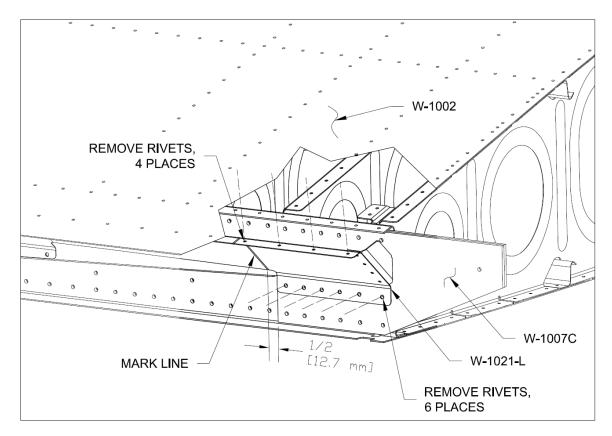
REMOVING FLAP GAP FAIRING RIVETS
